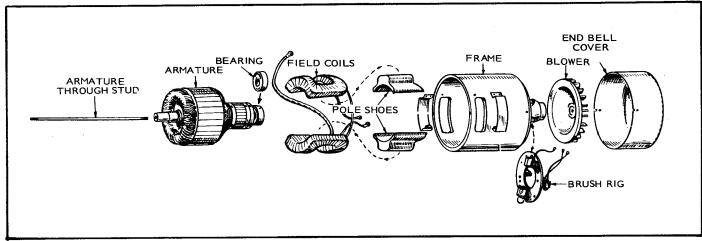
AK-AJ, 2 POLE GENERATOR ASSEMBLY
